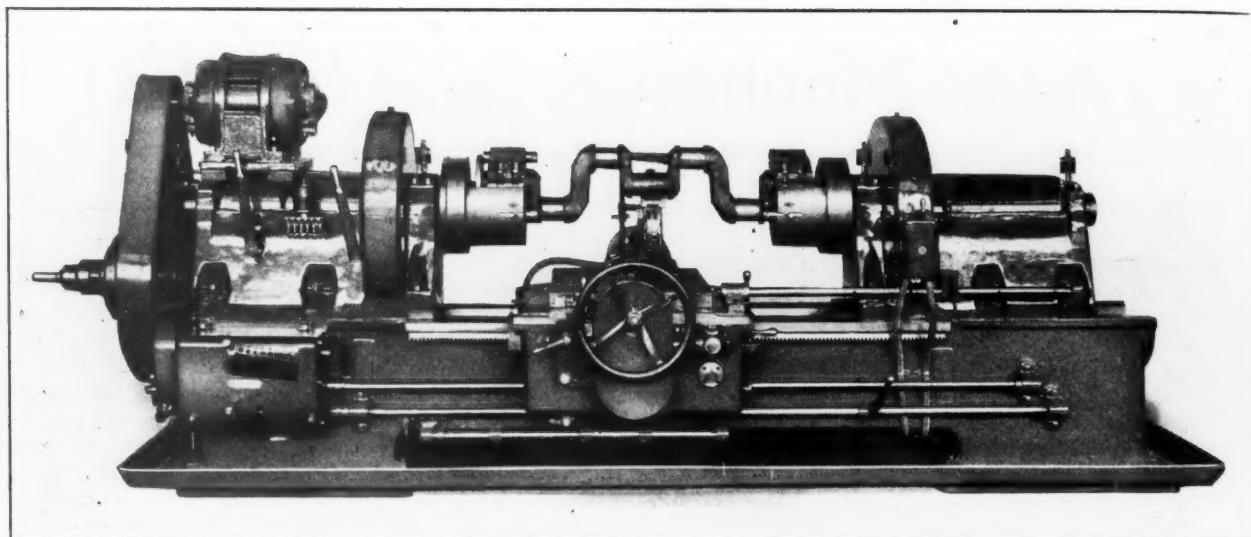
Universal Crankshaft Lathe designed for finishing One Pin at a Time
